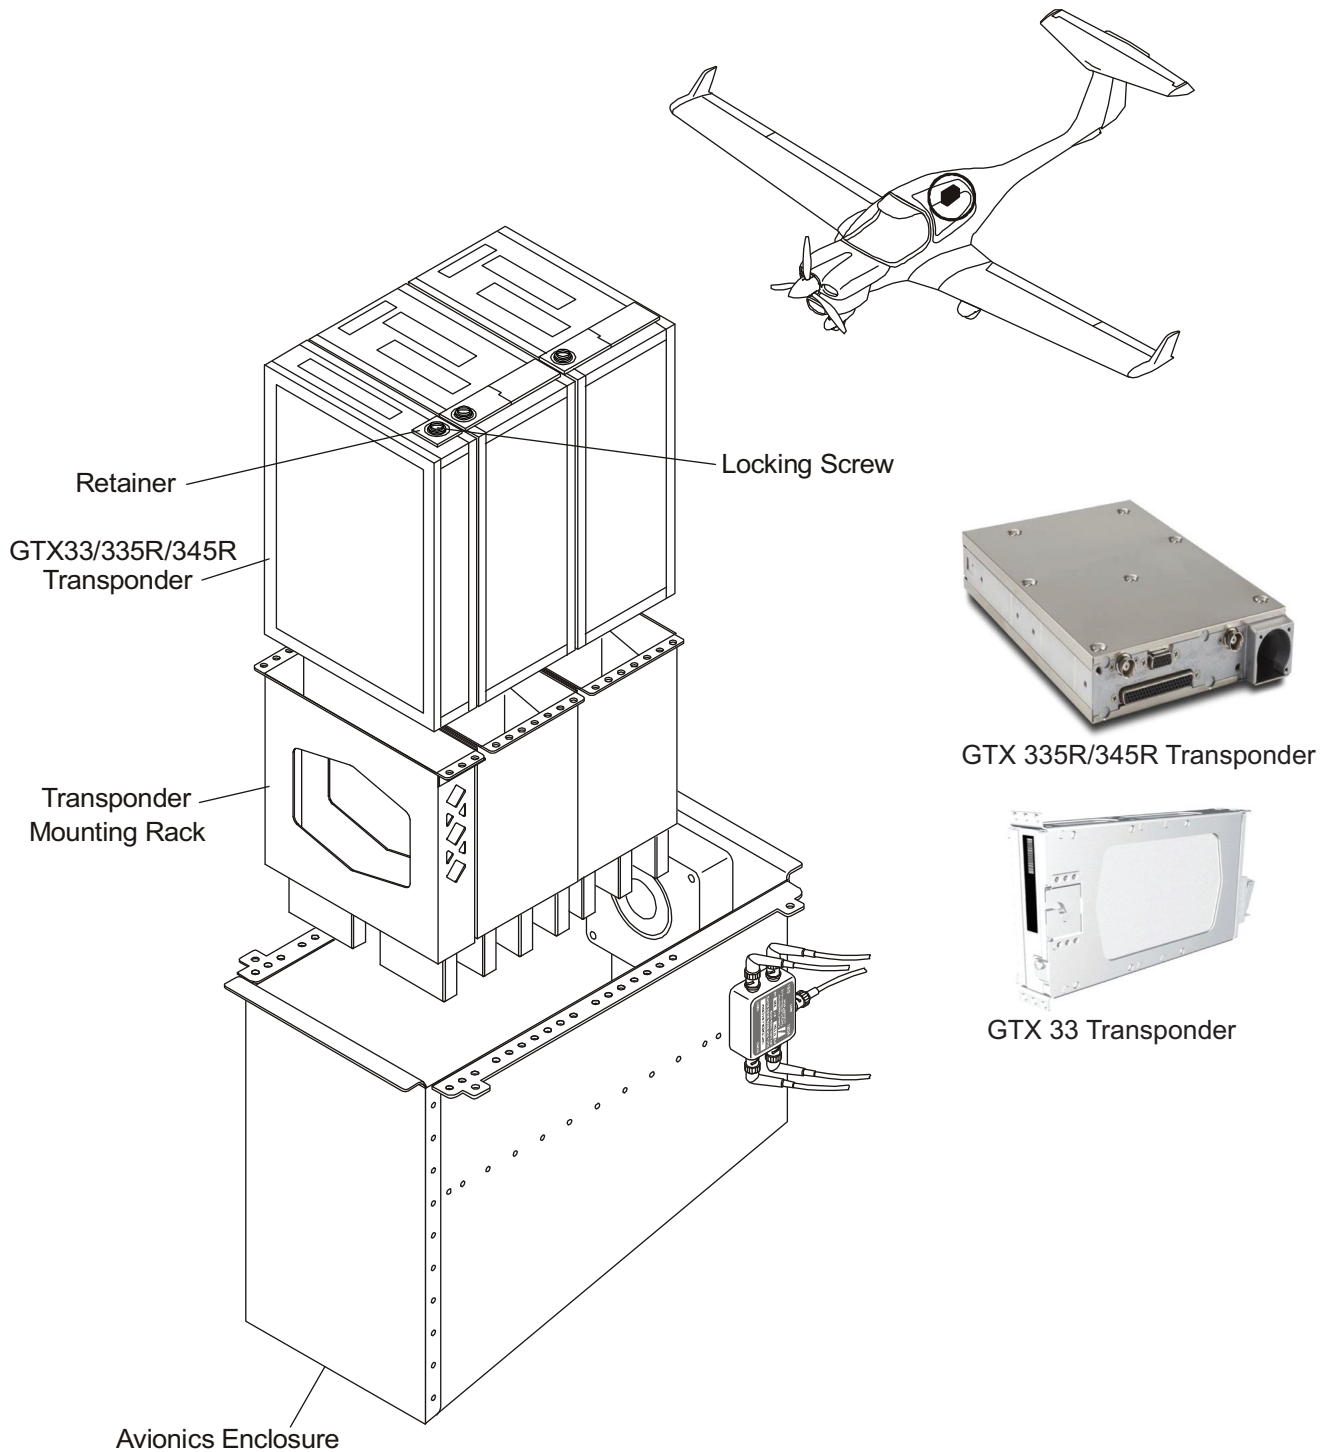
GTX33 / 335R / 345R Transponder - Removal/Installation
